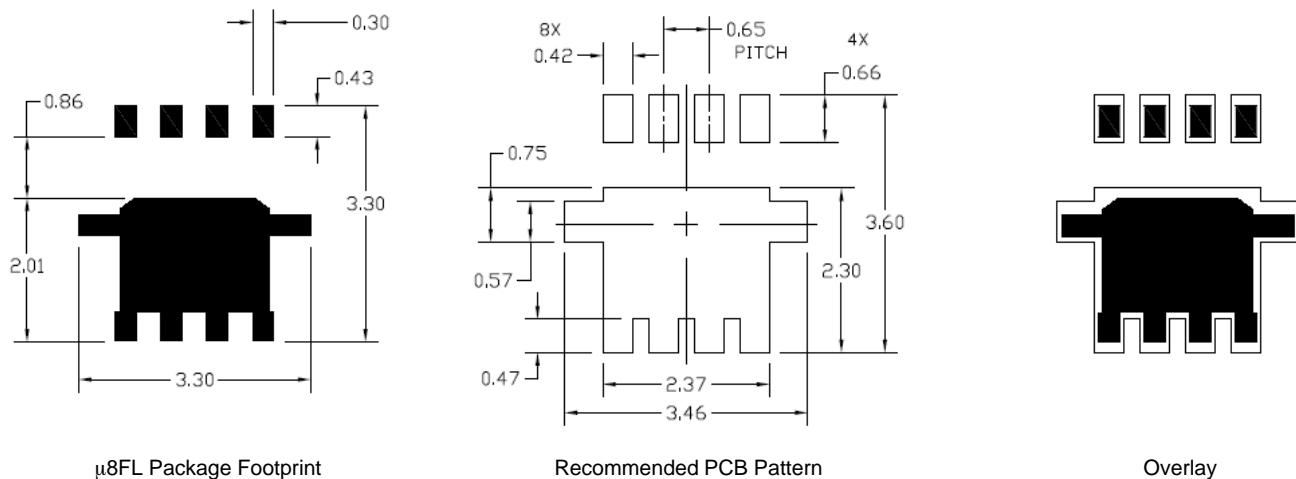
Printed Circuit Board Layout using Non-Solder Masked Defined Pads
